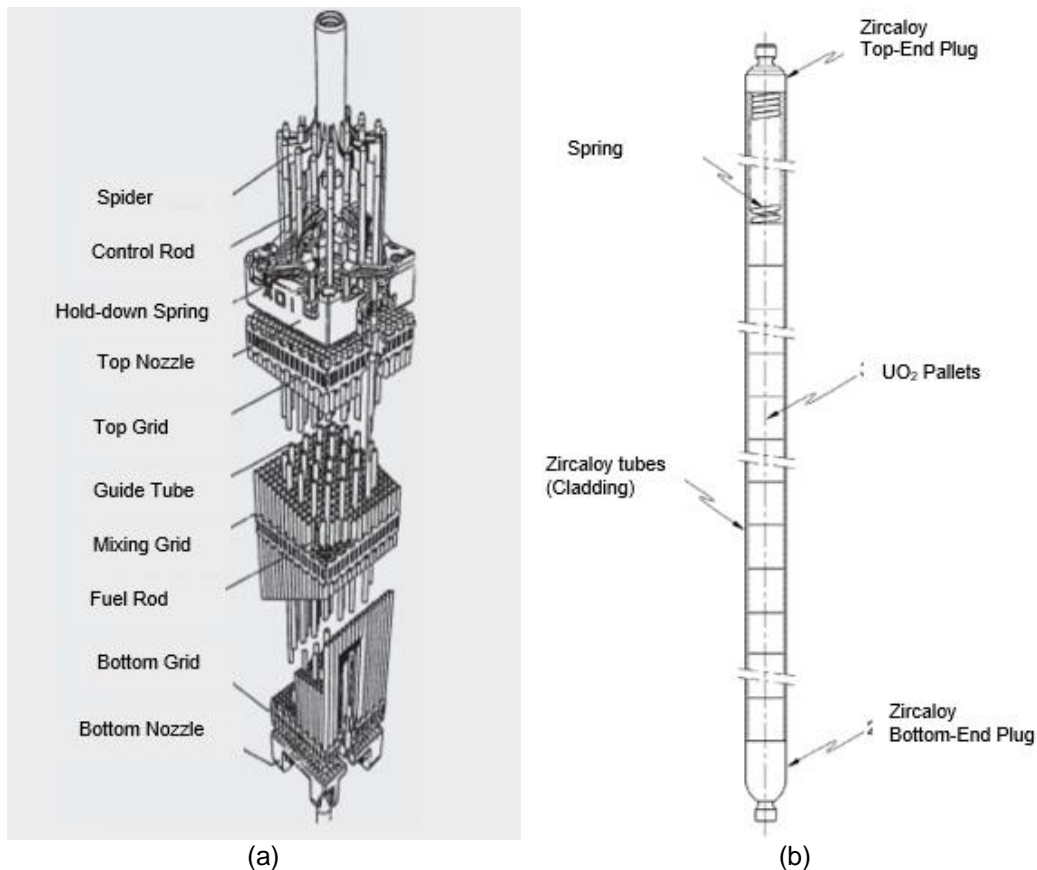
(a) Schematic view of PWR Fuel Assembly, modified after Parisot & France (2009a) and (b) Schematic view of a PWR fuel rod assembly, modified after Lee et al. (2009)
